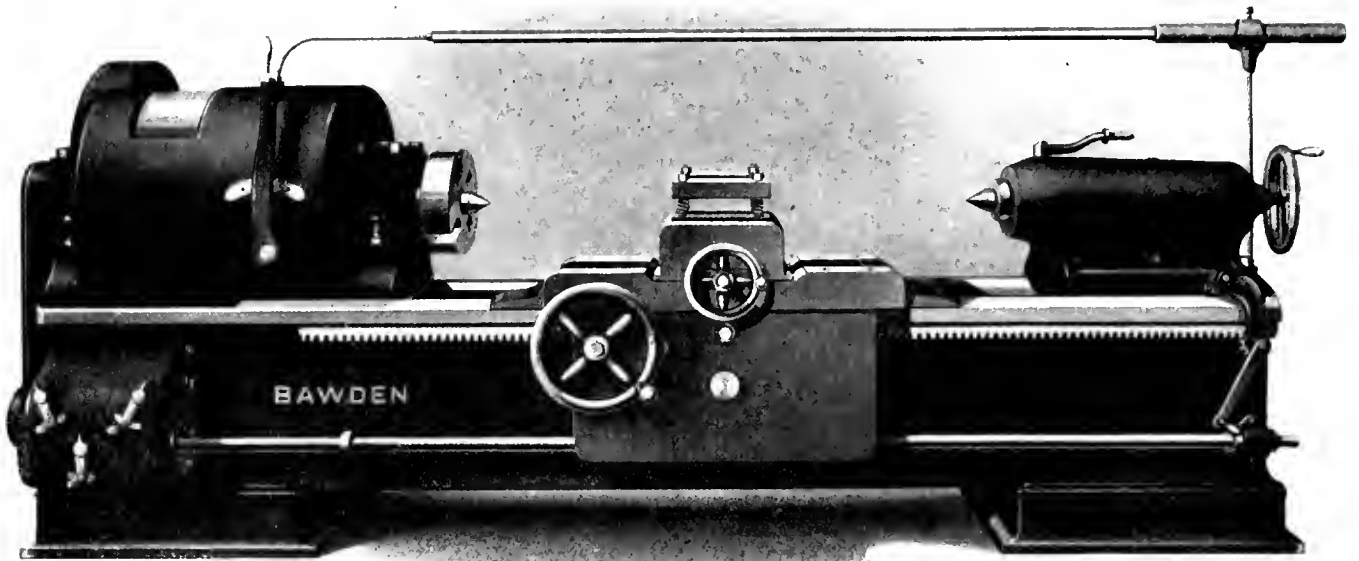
TRIPLE-GEARED HEAVY DUTY SHELL LATHE WITH 26-IN. SWING AND SINGLE PULLEY DRIVE.
